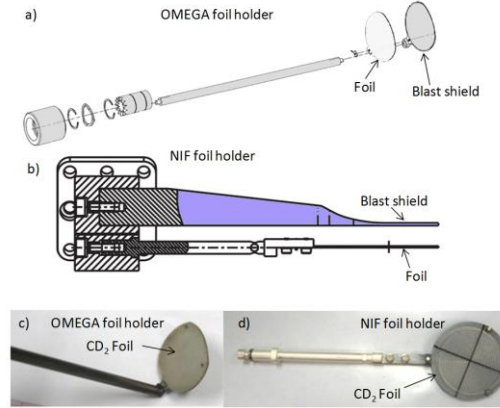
a) A CAD drawing of the OMEGA MRS foil holder, which illustrates the 500 $\mu\text{m}$  stainless steel blast shield, the foil, which is flush against the blast shield, and the insertion rod that attaches to the NDI. b) A CAD drawing of the NIF MRS foil holder, which illustrates, the tapered Ta blast shield (described in the text), the foil holder, which is attached directly to the foil and offset from the blast shield by 5mm, and the bracket that attaches to the DIM. c) OMEGA MRS foil holder with the 13.2  $\text{cm}^2$  low resolution  $\text{CD}_2$  foil attached. d) NIF MRS foil holder with the 12.8  $\text{cm}^2$  low-resolution  $\text{CD}_2$  foil attached (blast shield not shown).
